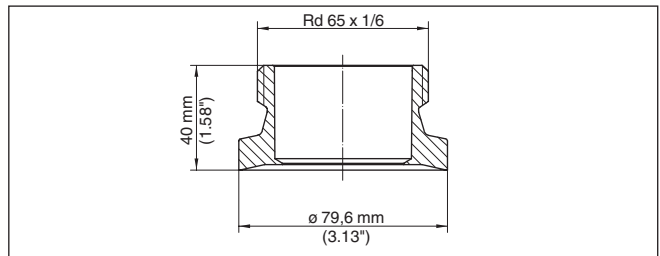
Dimensions of welded socket, hygienic fitting F40 with compression nut
